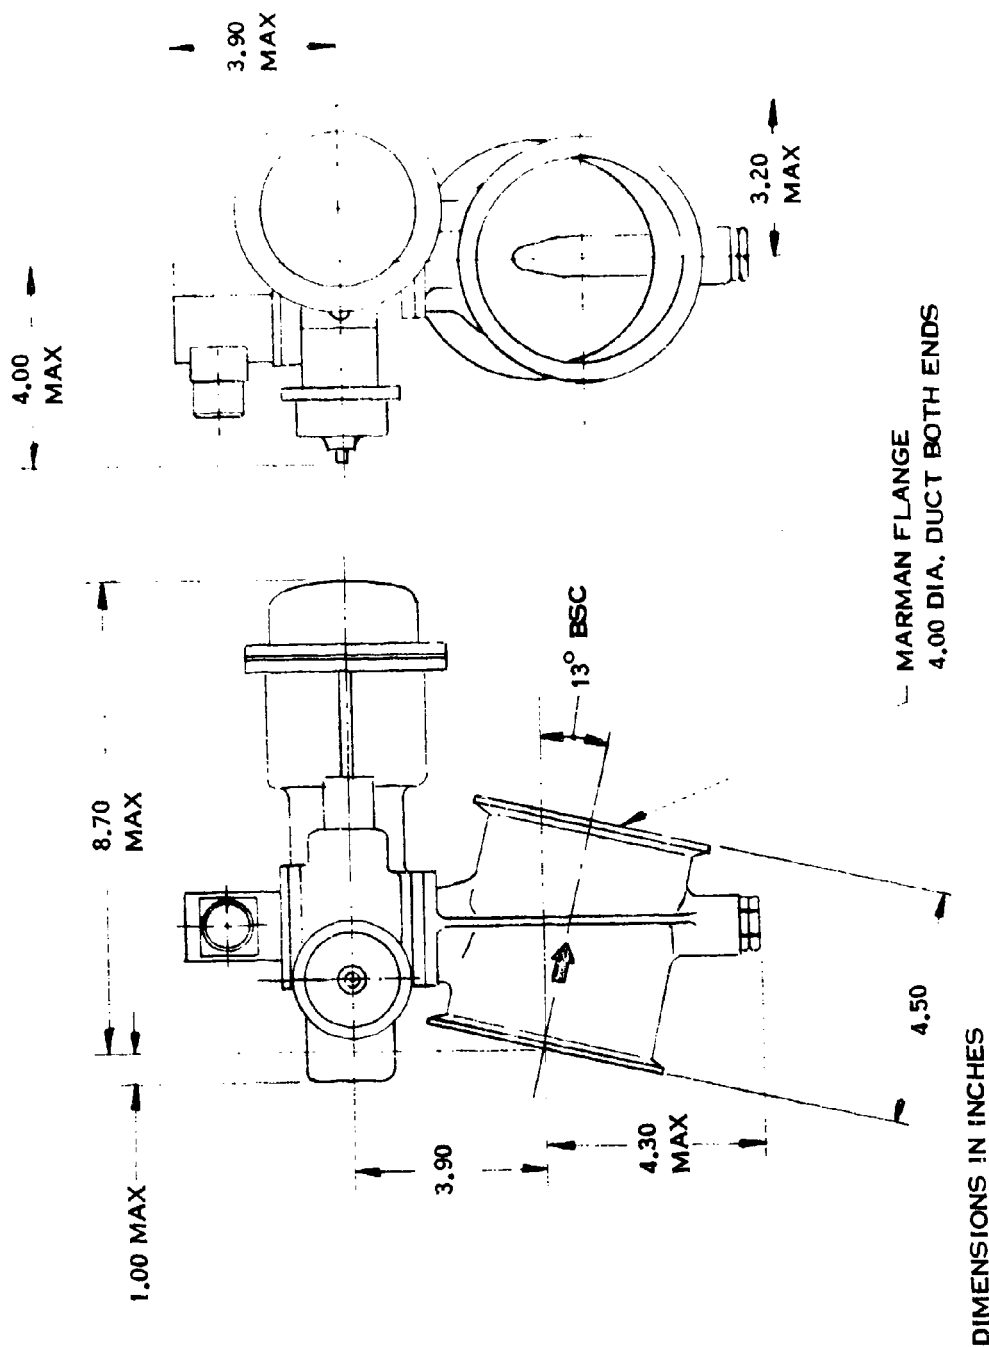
PRESSURE REGULATING AND SHUT-OFF VALVE
